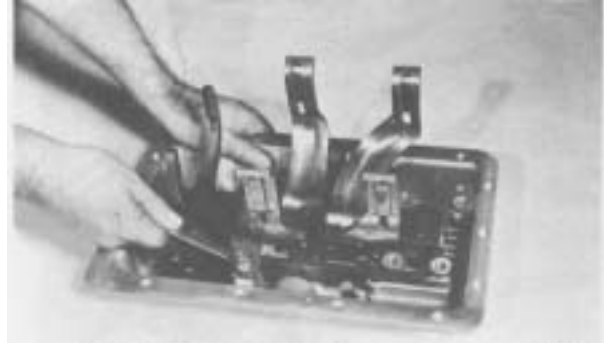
Install rail support capscrews and washers. Tighten capscrews slightly.
